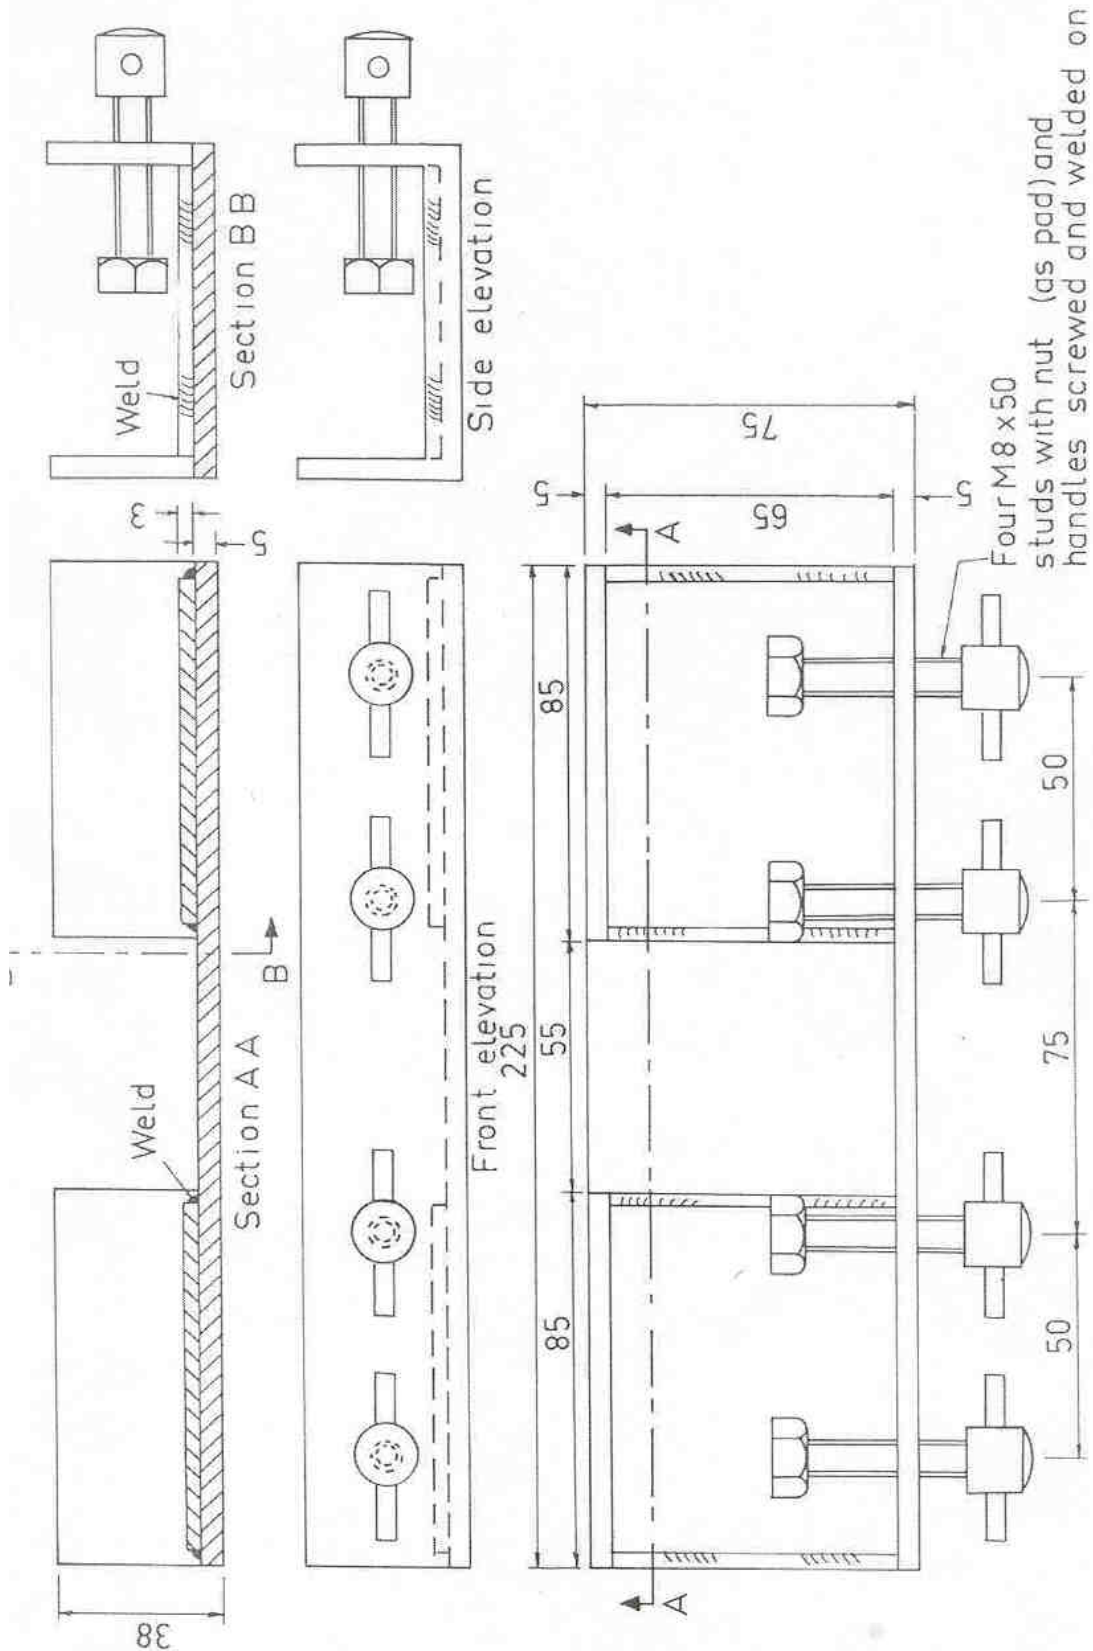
Transfer jig for Fuel Immersion Test for Fuel Resistant Hot Poured Joint Sealing Compounds (Test Method N° T1174)
